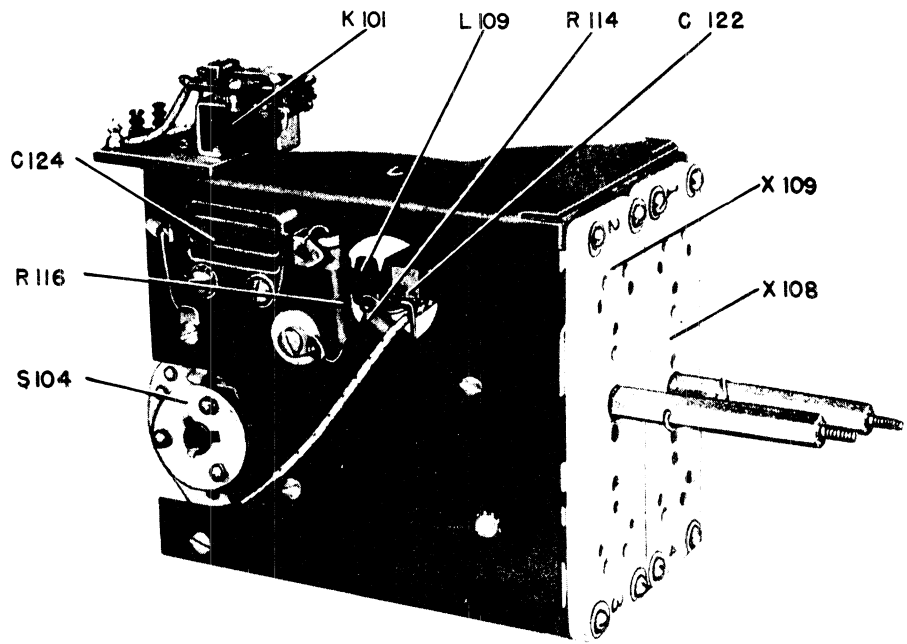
Transmitter Crystal-Bracket Assembly—Top View
